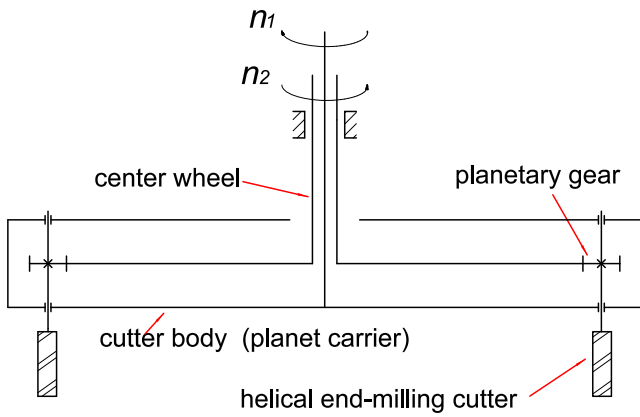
shows the schematic of the differential planetary gear train implementation form of the milling–milling machining method. We can change  $n_2$  to control the speed of the end-milling cutter when the spindle speed ( $n_1$ ) is constant. The main advantage of this implementation form is achieving a large transmission ratio between the planetary gears and the cutter body (the planet carrier). Meanwhile, its drawback is the requirement to change or redesign a new machine.
